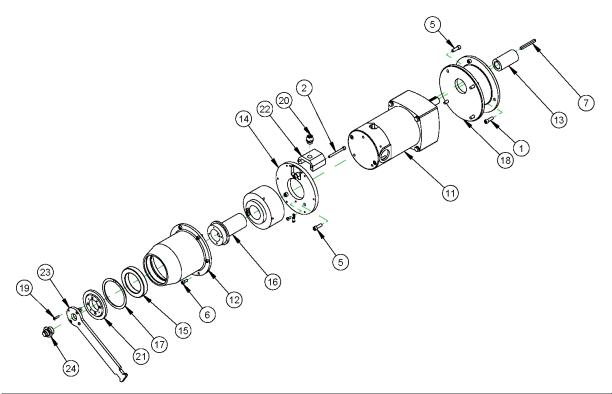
ELECTRIC AXIAL FEED ASSEMBLY (P/N 41062)
